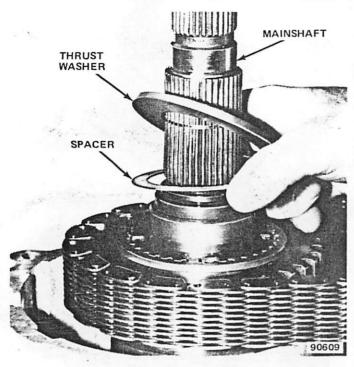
D-14 Drive Sprocket Thrust Washer and Spacer Removal/Installation
